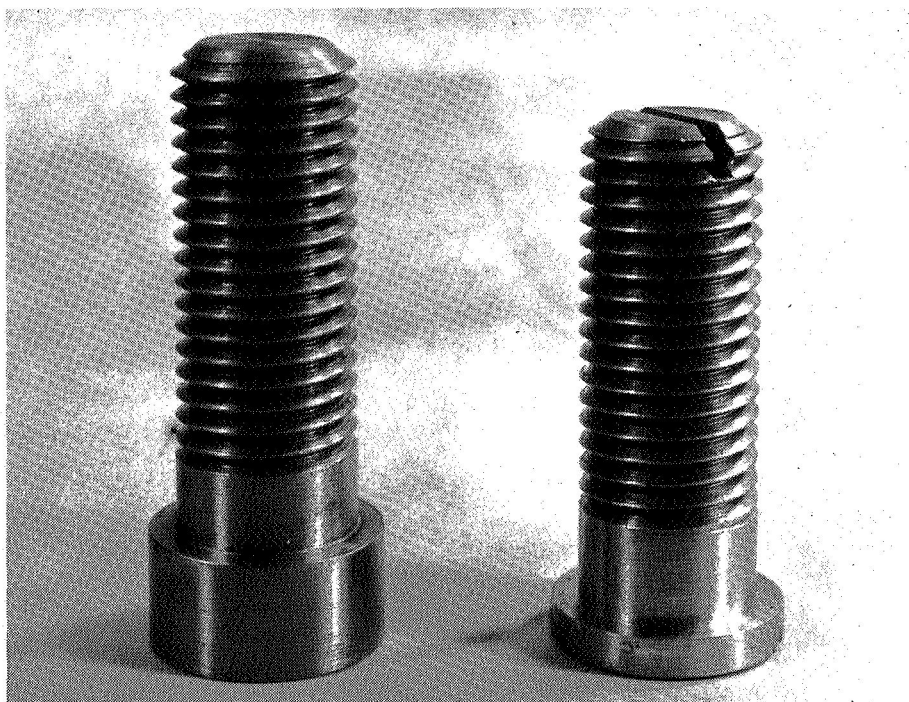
1-INCH FILLISTER-HEAD BOLTS
